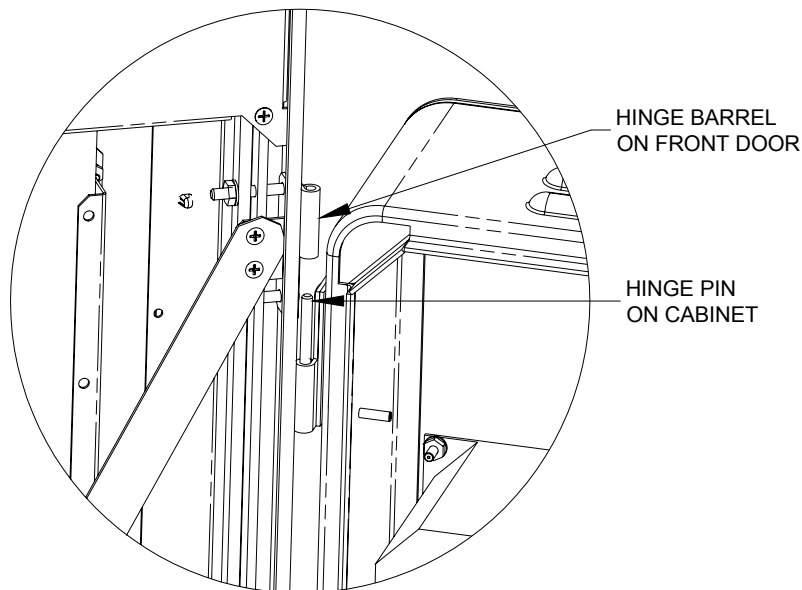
B – Detail View of Top Cabinet Hinge with Front Door Opened
